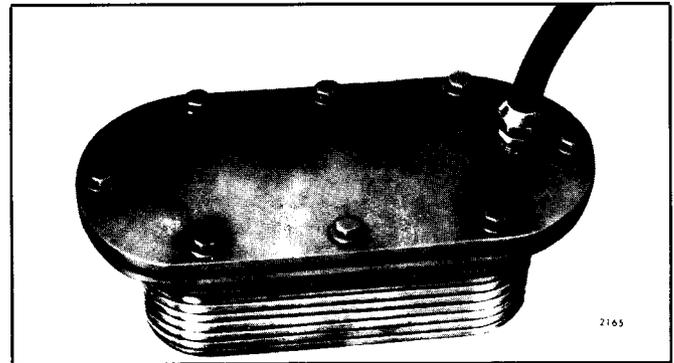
Preparing Oil Cooler Core for Pressure Test
